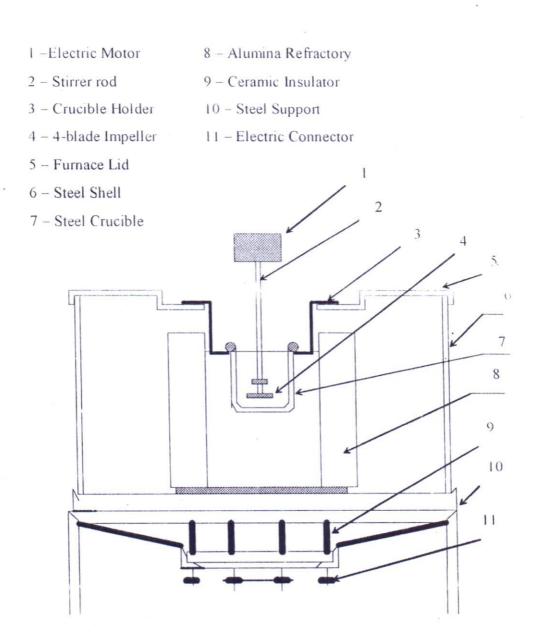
Schematic Drawing of Apparatus used for Stir-casting of
